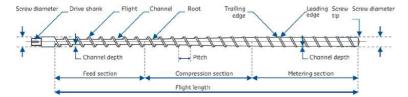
Standard three-zone extruder screw, courtesy of William Reay, Kuraray, FVAL Division
